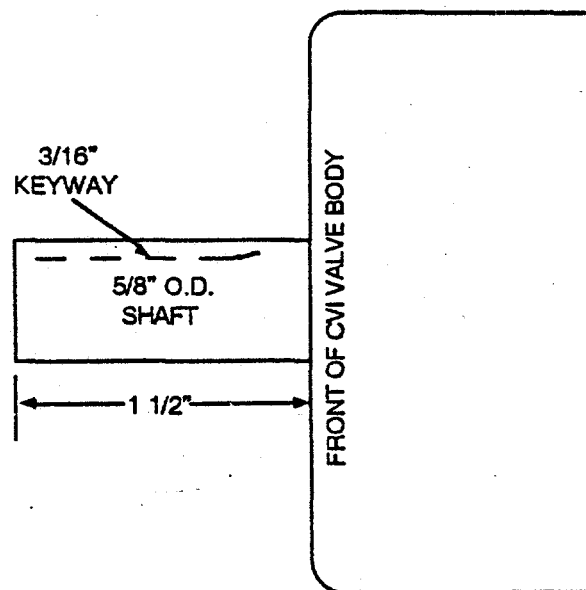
The CVI cam is driven by a 5/8" O.D. shaft with a 3/16" keyway, protruding 1.5" from the front of the valve body.
